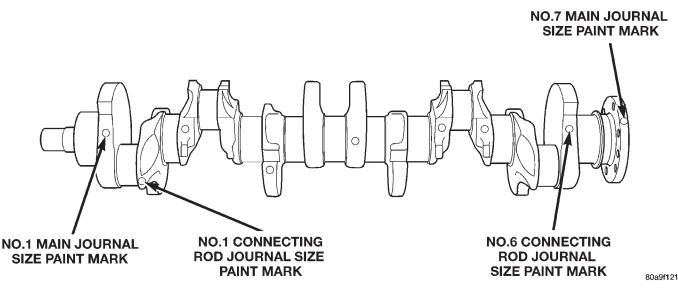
Crankshaft Journal Size Paint I.D. Location
